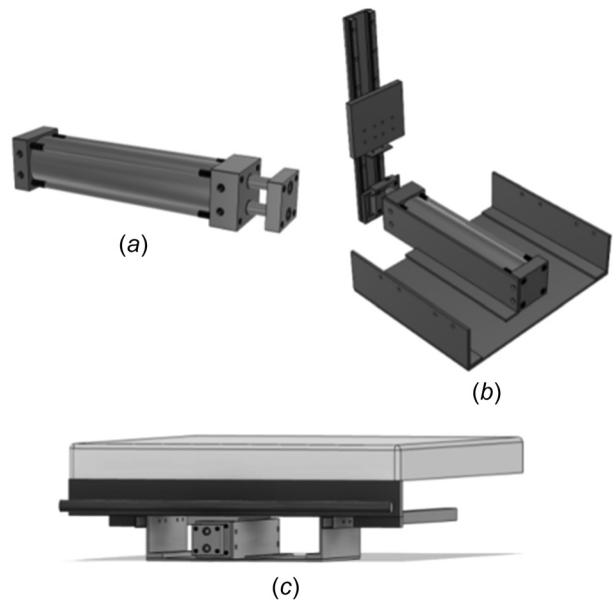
CAD of prototype setup: (a) nonrotating NFPA tie rod air cylinder (double acting, 2-1/2" bore size, 3" wide, 10" stroke length, 0.63" rod diameter, smaller piston area = 2.746 in²), (b) top view of the mount attached to the cylinder with an L-bracket, and (c) view of the cylinder mounted under the hospital bed
